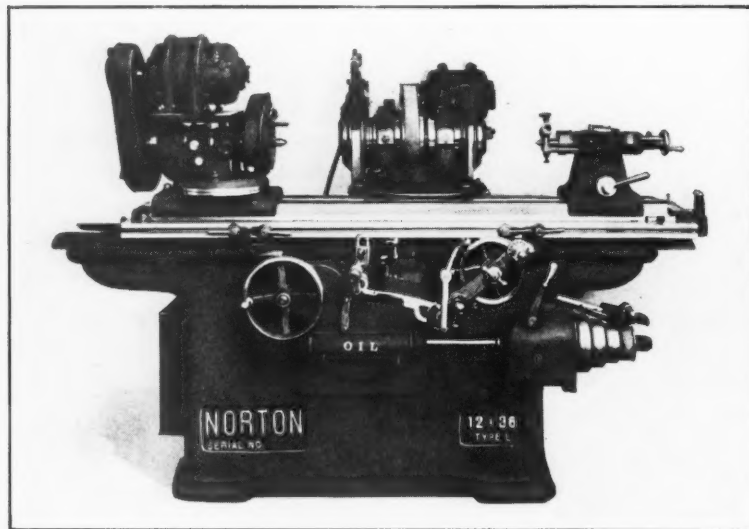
Norton Universal Grinding Machine Driven by Three Motors
